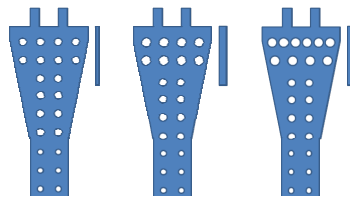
Existing solutions to avoid the failure of fasteners
